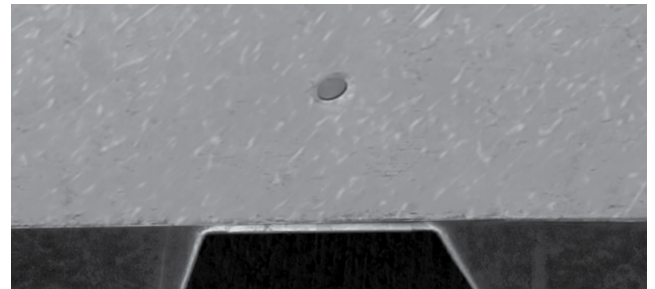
SMOOTH SERIES™ RIVET ATTACHMENT
